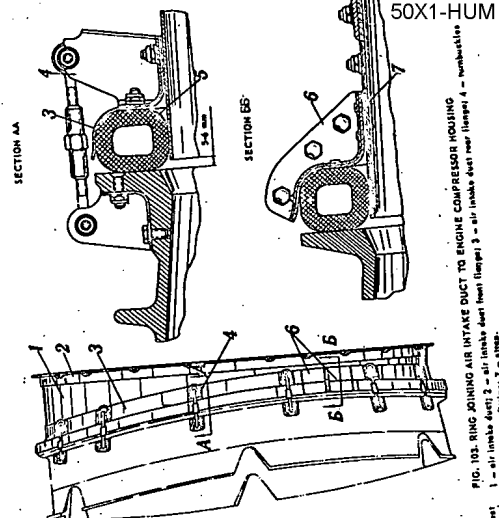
RING JOINING AIR INTAKE DUCT TO ENGINE COMPRESSOR HOUSING
